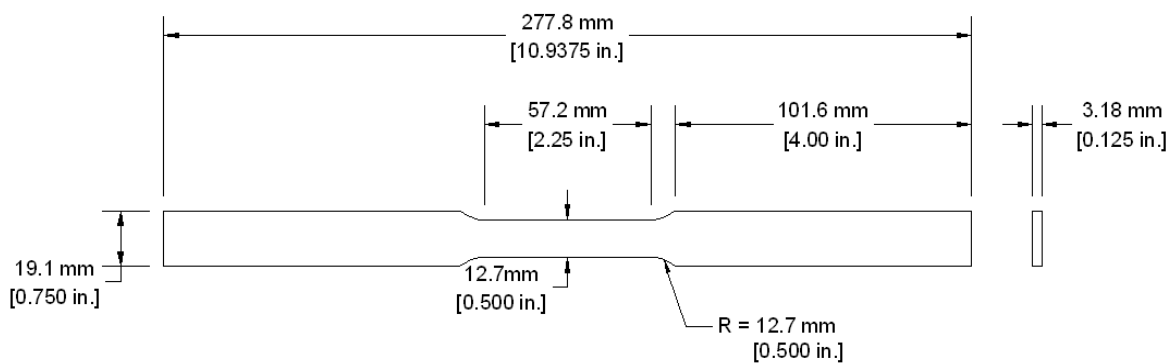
3.18 mm [0.125 in.] Standard tension specimens
